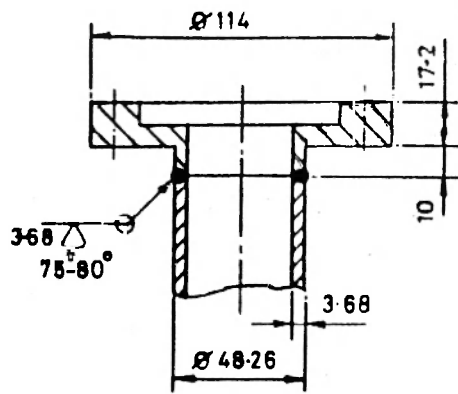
(d) Joint design for nozzle to CF64 flange (Monel 400)
